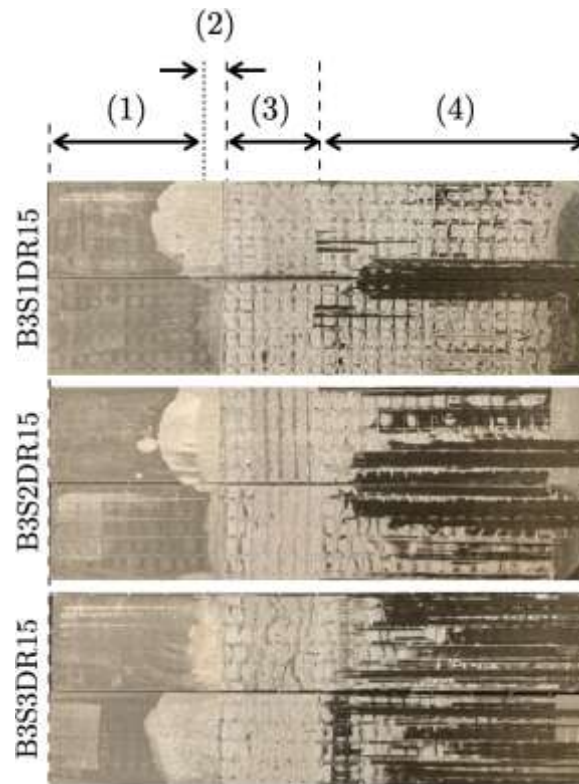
ENF 15 mm/s post-testing visual inspection of the fracture surfaces. Crack propagation occurring from right to left.
